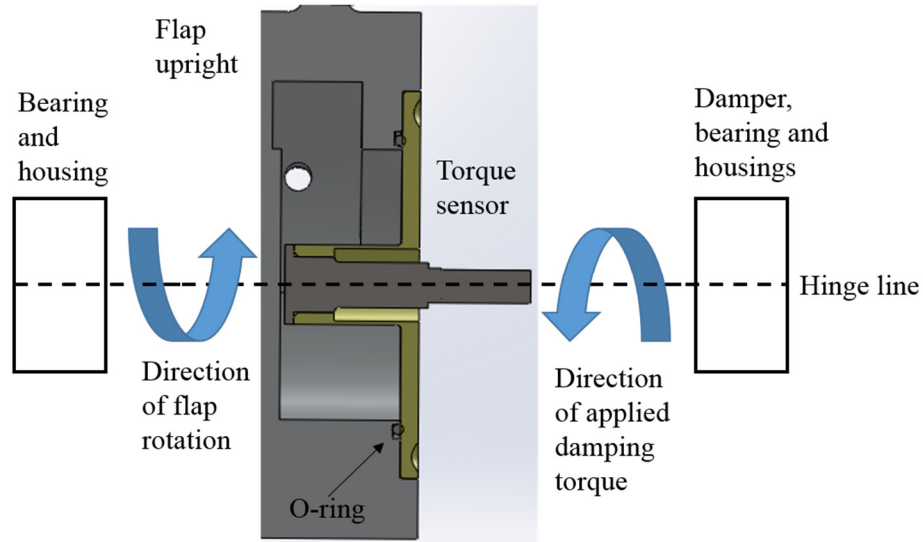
Diagram illustrating the application of torque and position of the torque sensor in the hinge subassembly.
